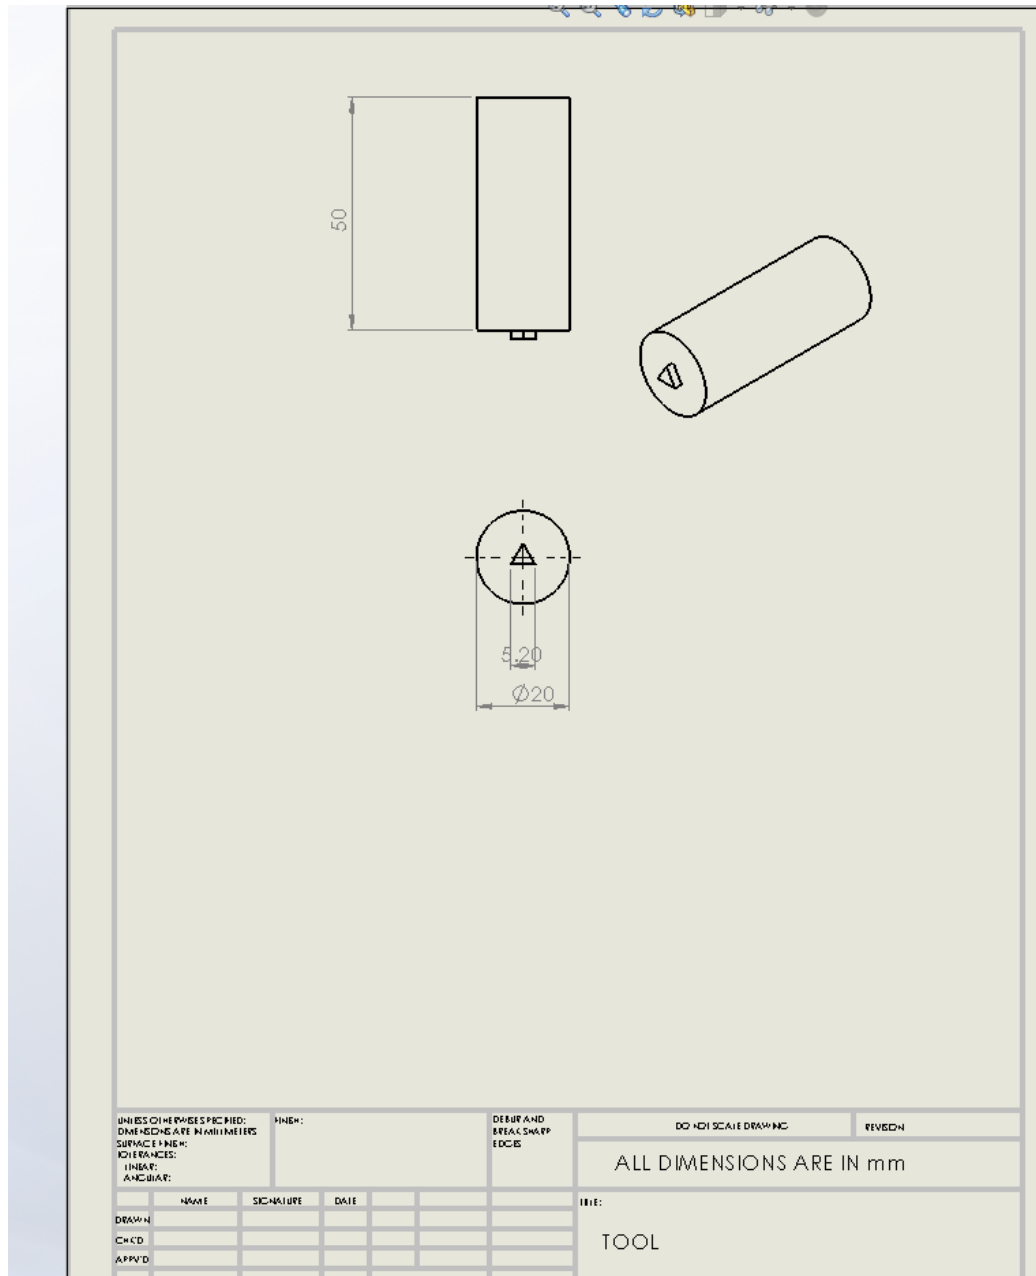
Draft of Design tool (Triangular Probe) using Solid Works
